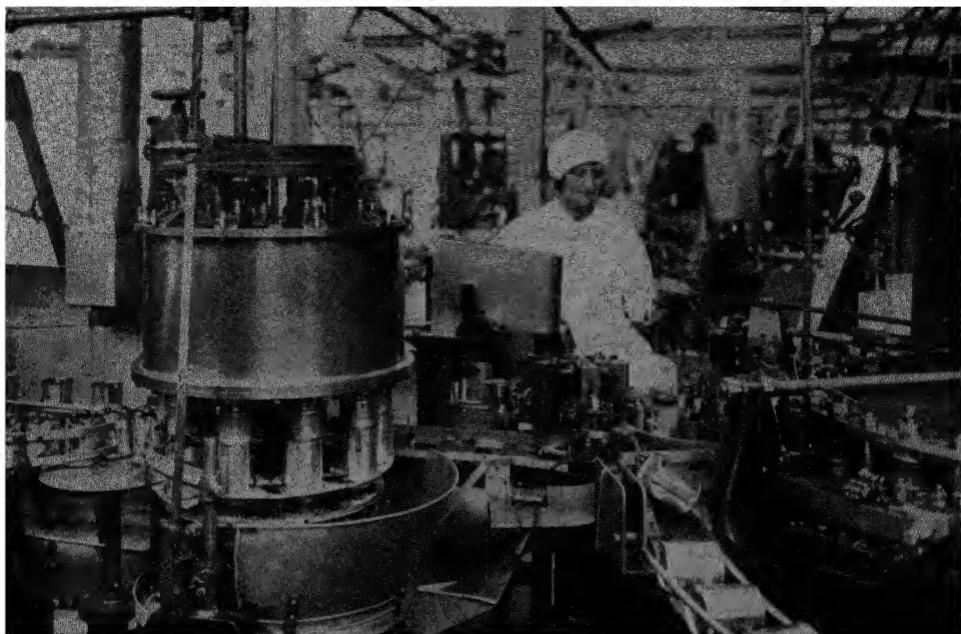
AFTER THE CANS HAVE BEEN FILLED WITH FRUIT AND THE SYRUP ADDED THEY ARE SEALED BY MACHINERY WITHOUT THE USE OF SOLDER.
